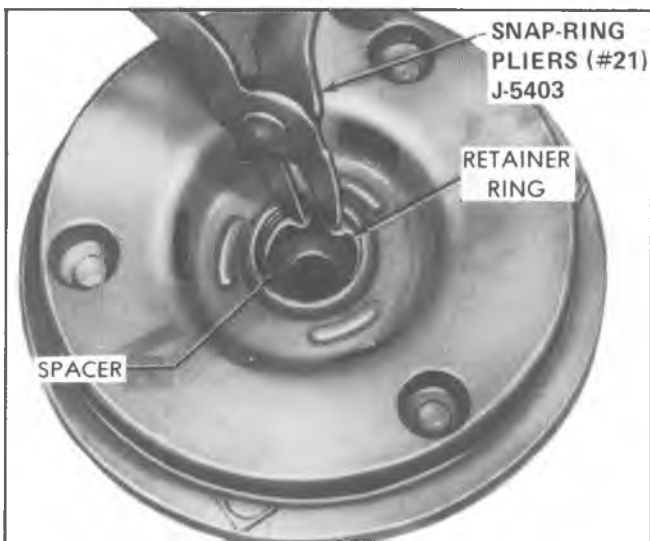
Removing or Installing Retainer Ring in A-6 Clutch Drive Plate
